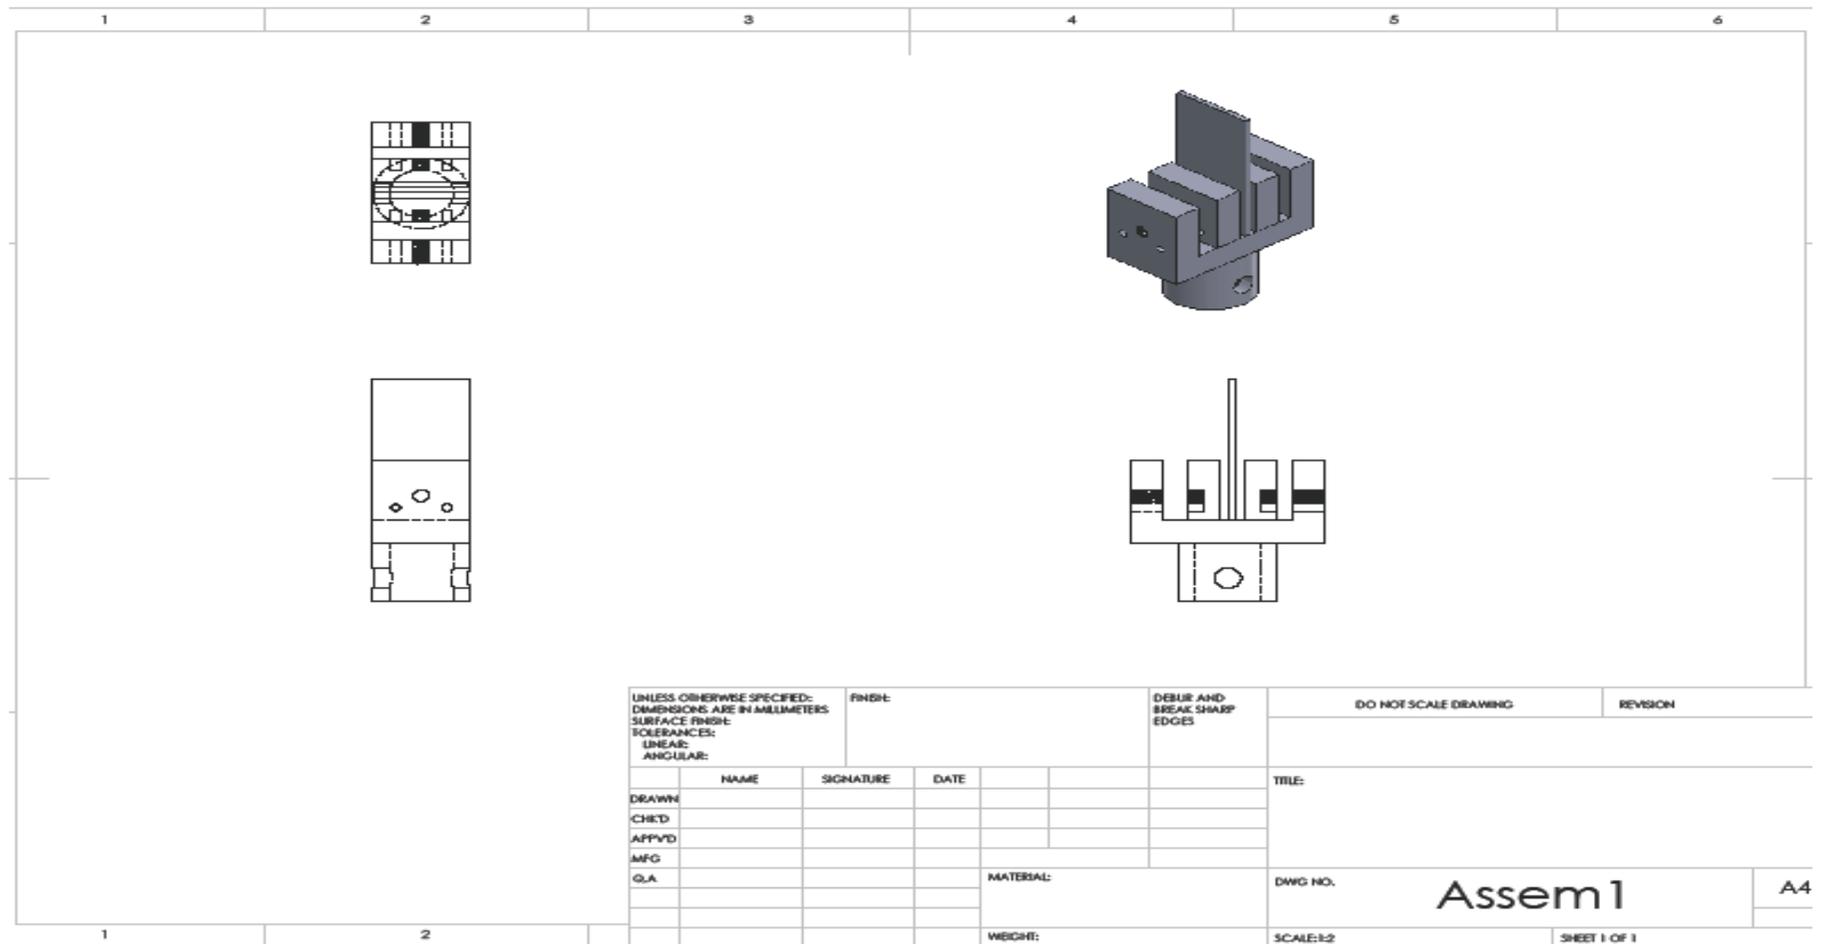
Assembly drawing of the bond strength testing clamp with plate
